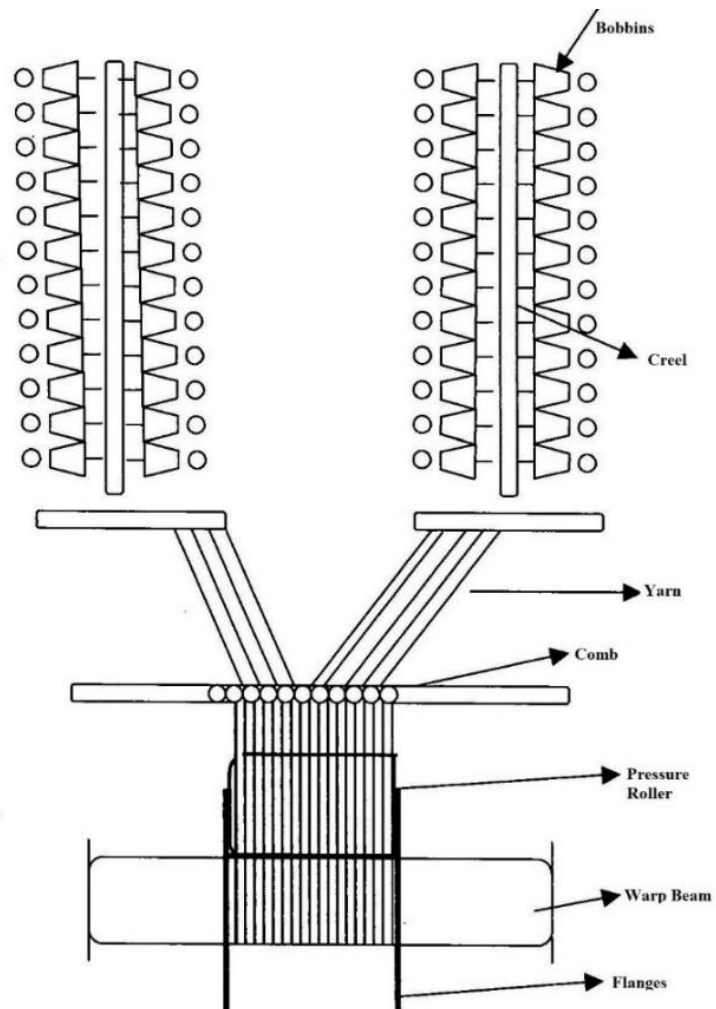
Narrow width beam for fine count high twist yarn (40)
